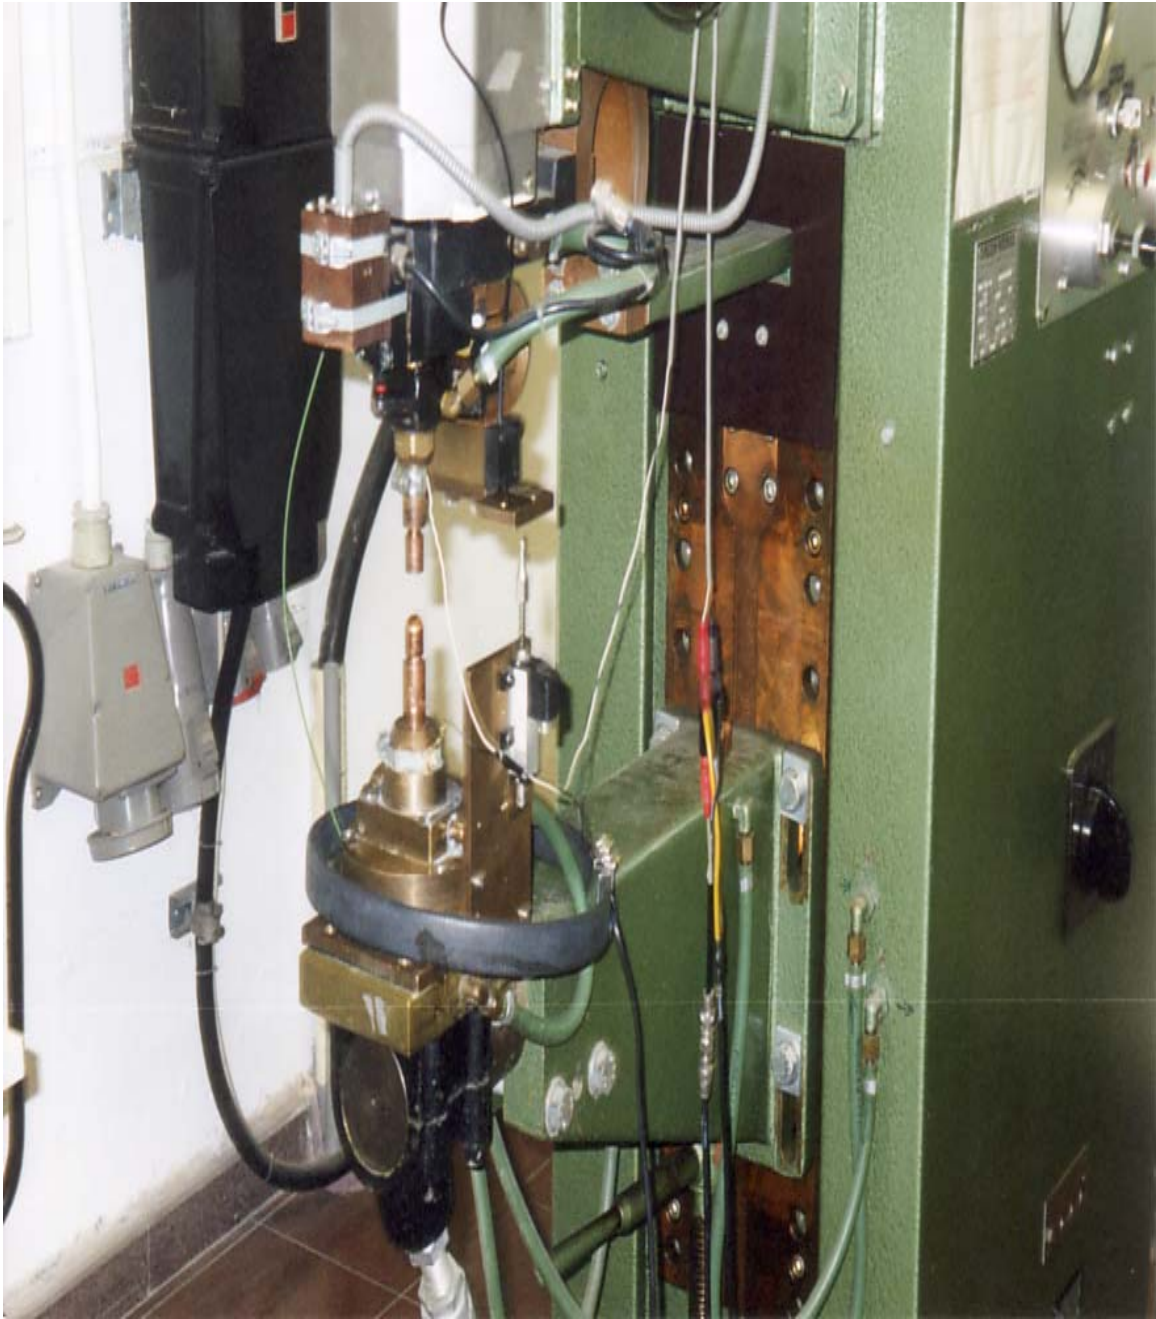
PMS-stationary Resistance spot welding machine
